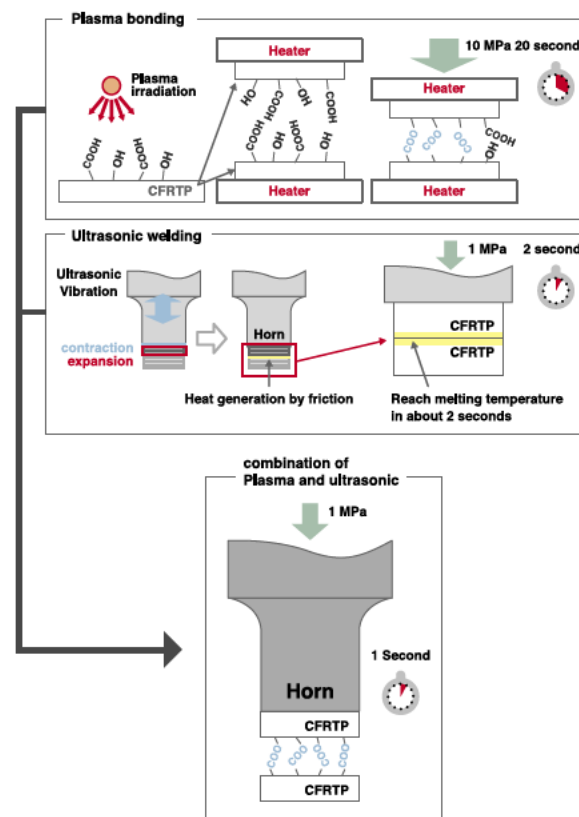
Combined process of plasma bonding and ultrasonic welding
